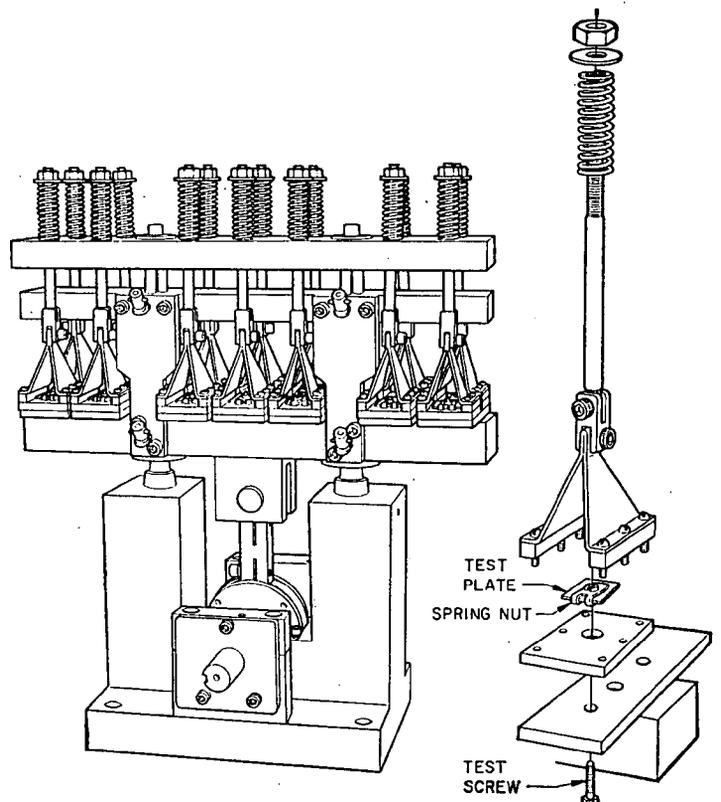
TYPICAL VIBRATION TEST FIXTURE
